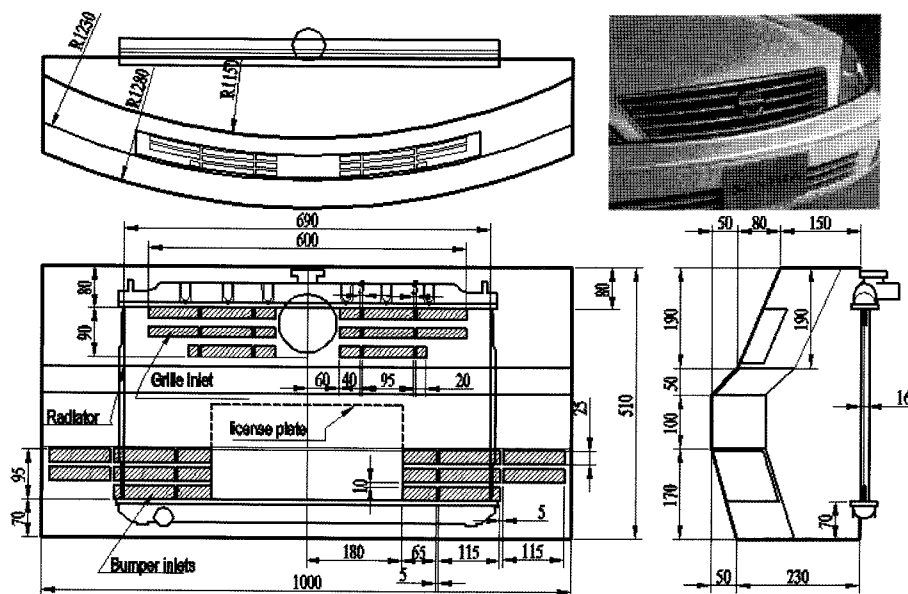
The multiview drawing for the geometric dimension (unit: mm).
